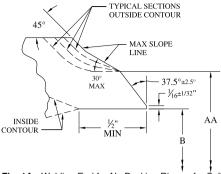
A.- Welding End for No Backing Ring or for Split Backing Ring. Pipe Wall Thickness "t" 7/8" and less.
